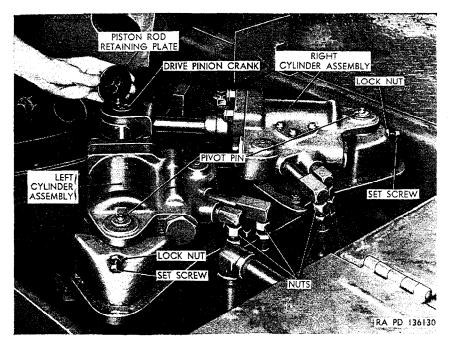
Removing piston rod retaining plate from drive pinion crank M62.
